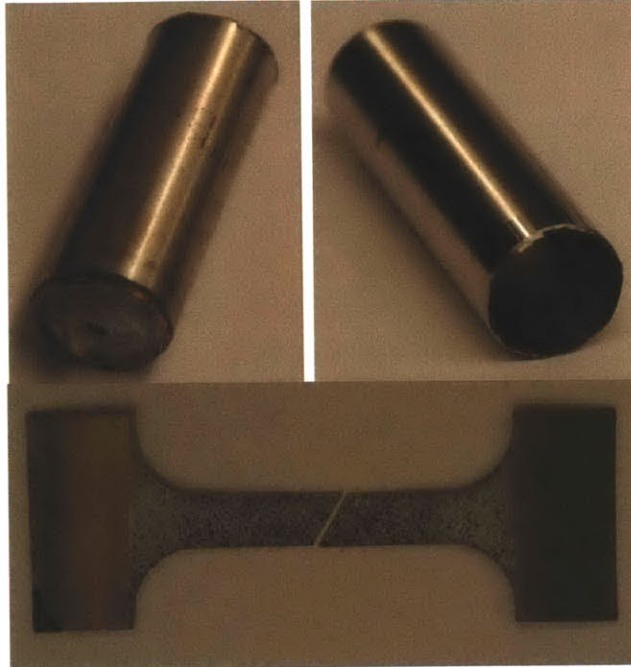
Endcaps removed (left), an empty 18650 shell casing (right), and a fractured dogbone specimen (bottom)
